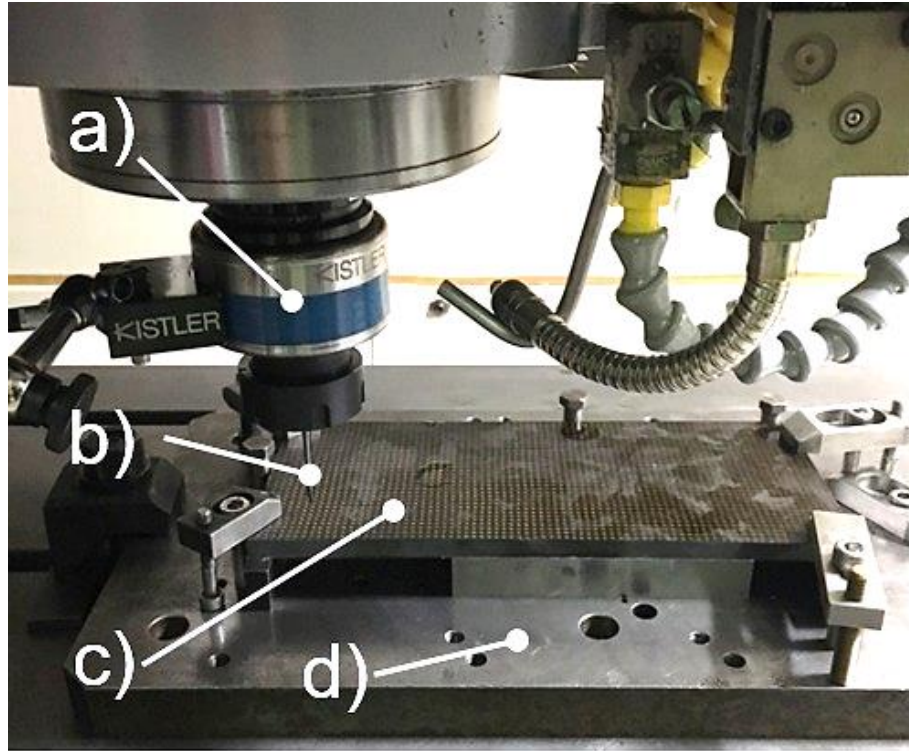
Experimental setup for drilling tests: (a) dynamometer, (b) tested drill, (c) CFRP workpiece, and (d) fixture
